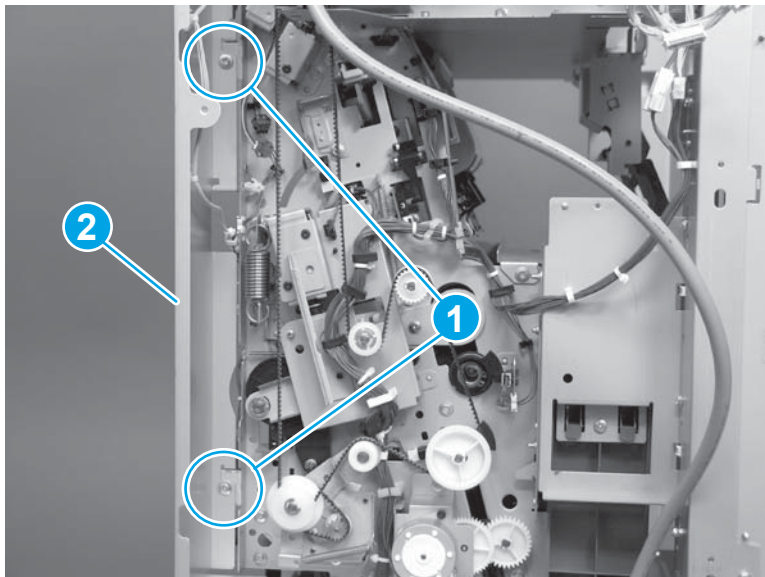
Remove the saddle rear end sensor assembly (1 of 10)
